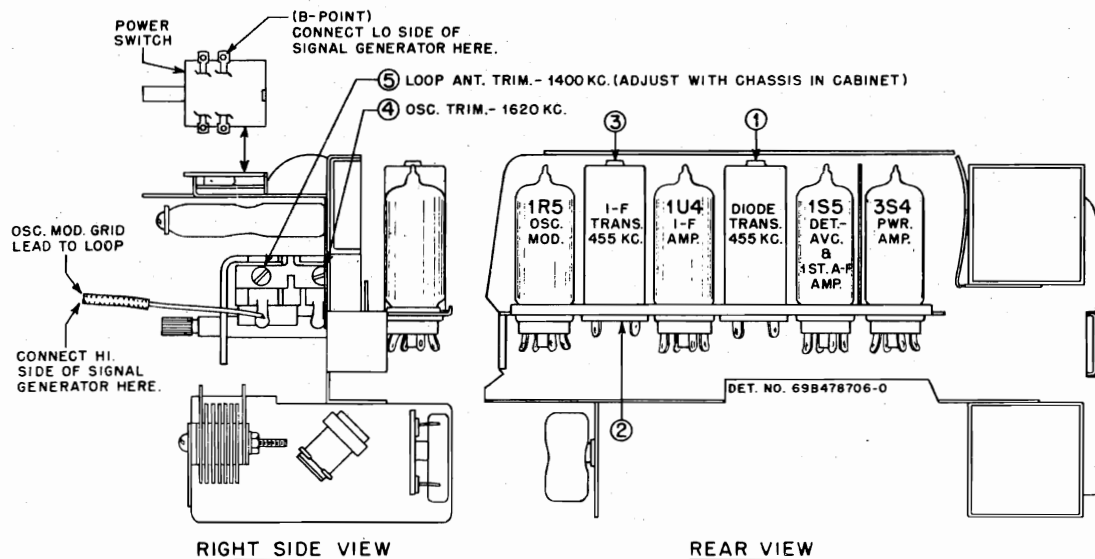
CHASSIS HS-62A TUBE & TRIMMER LOCATIONS
